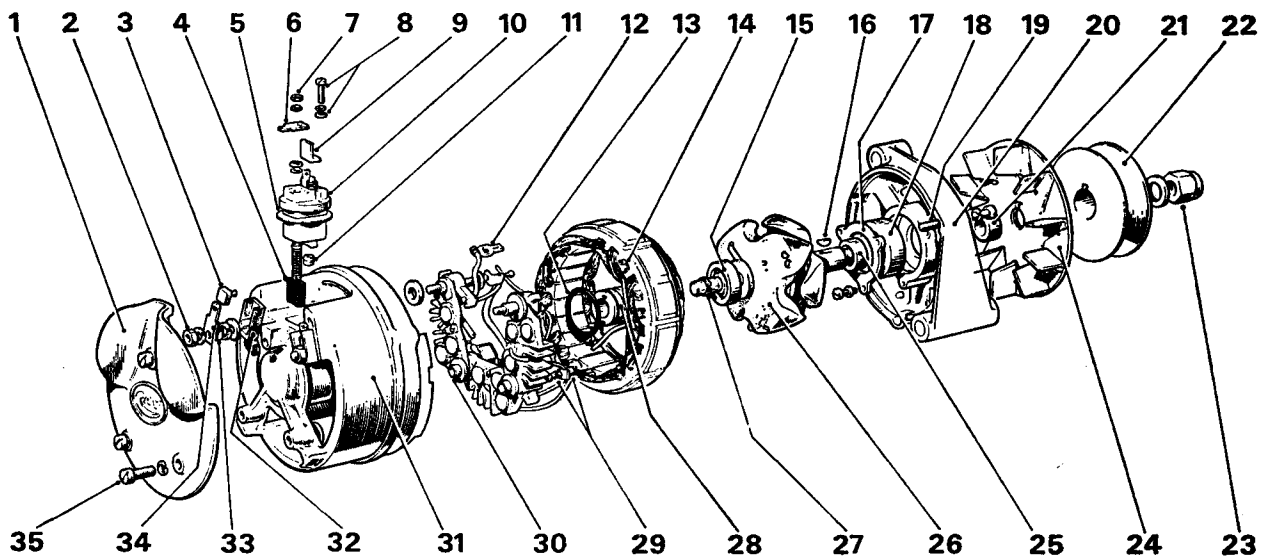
EXPLODED VIEW OF CAV 512 ALTERNATOR
